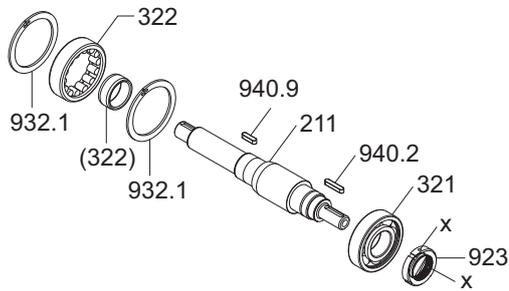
Pump shaft disassembly (bearing bracket, no lifetime lubrication)
